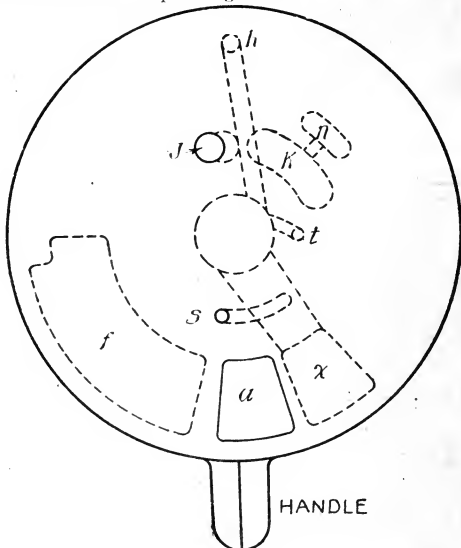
,985.—Detail of rotary valve of Westinghouse H-6 automatic brake valve. In the figure *a*, *j* and *s*, are ports extending directly through it, the latter connecting with a groove in the face; *f* and *k* are cavities in the valve face; *o* is the exhaust cavity; *x* and *l* are ports in the face of the valve connecting by cored passages with *o*; *h* is a port extending from the face over cavity *k* and connecting with exhaust cavity *o*; *n* is a groove in the face having a small port which connects through a cavity in the valve with cavity *k*. Referring to the ports in the rotary valve seats (fig. 1,981) *d* leads to the feed valve pipe; *b* and *c* lead to the brake pipe; *g* leads to chamber *D*; *EX*, is the exhaust opening leading out at the back of the valve; *e* is the preliminary exhaust port leading to chamber *D*; *r* is the warning port leading to the exhaust; *p* is the port leading to the pump governor; *l* leads to the distributing valve release pipe; *u* leads to the application cylinder pipe.
